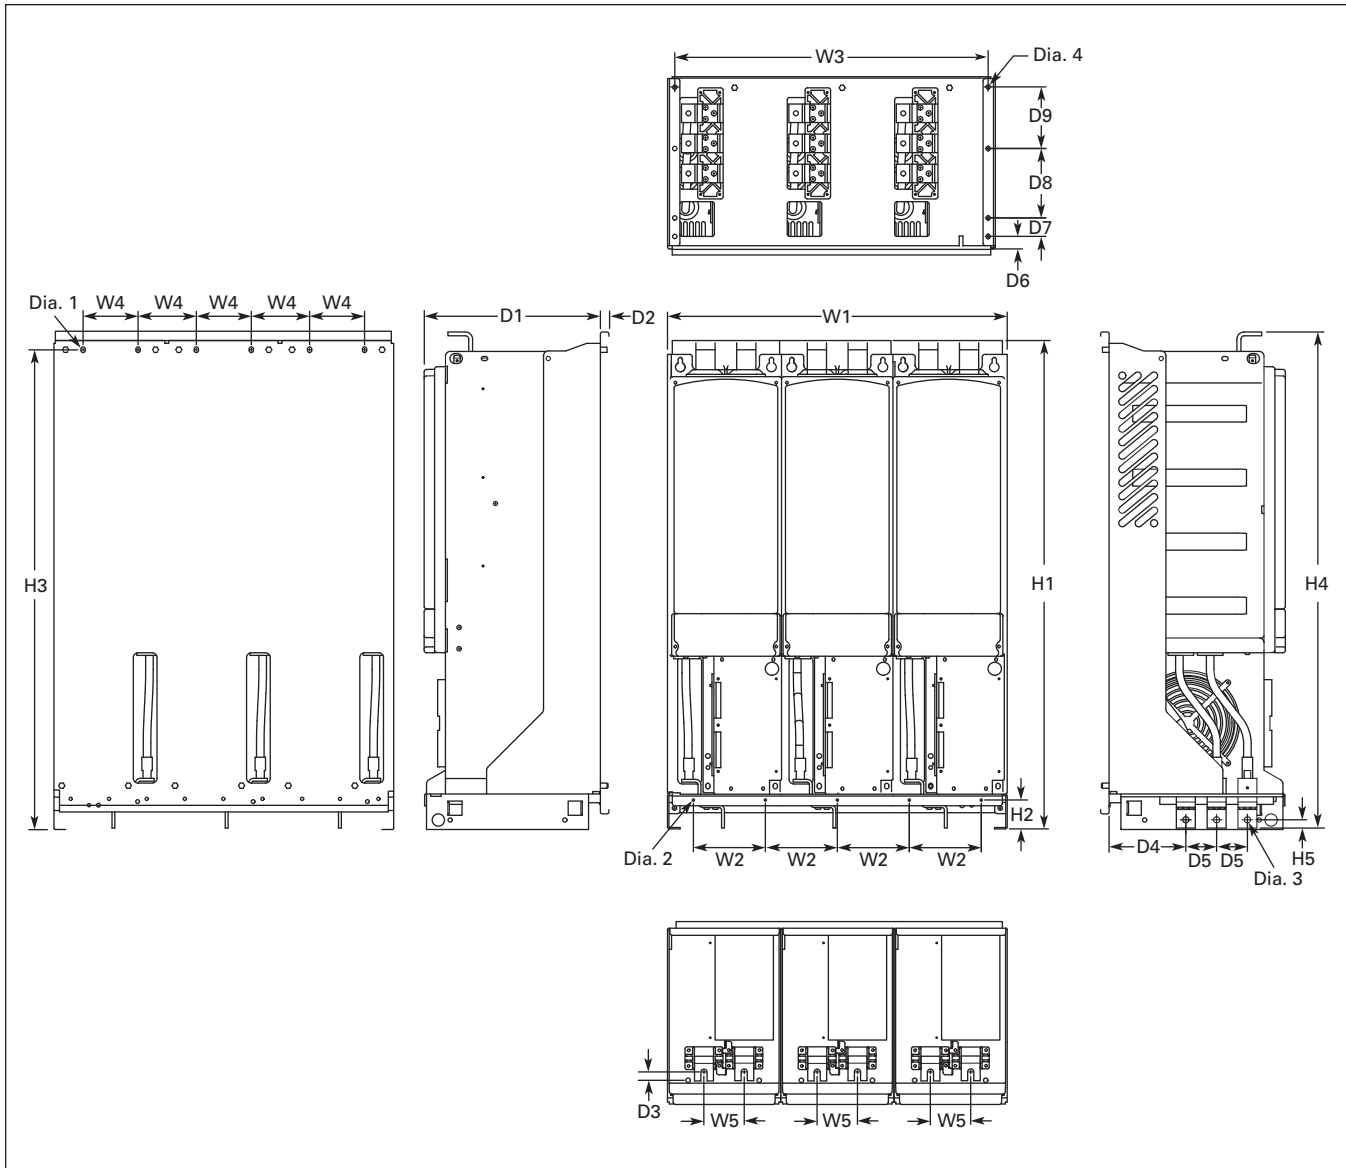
SPX9000 Dimensions, FR13 Open Chassis Converter — 900/1000 hp 480V
